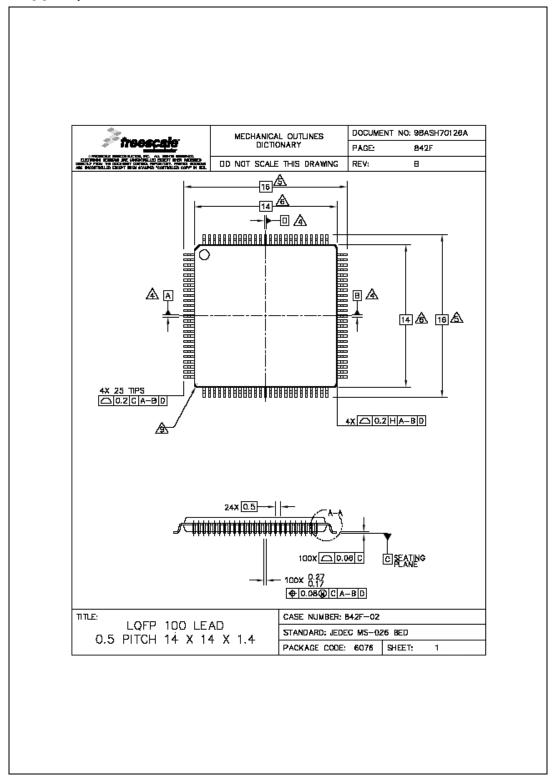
100 LQFP package mechanical drawing (Part 1 of 3)
